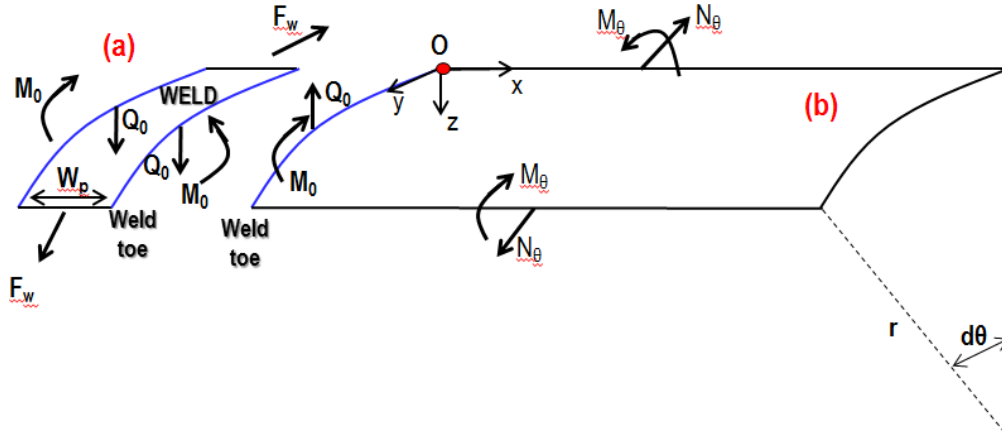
A two-part shell assembly model: (a) a shell section representing a girth weld of an equivalent width of W_p and (b) shell section representing pipe or vessel section away from the weld
